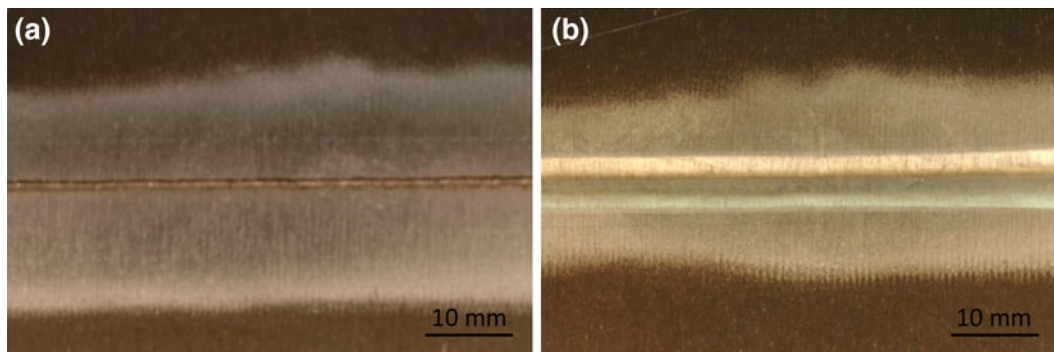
Top weld bead of (a) fiber laser-welded joints and (b) diode laser-welded joints.
